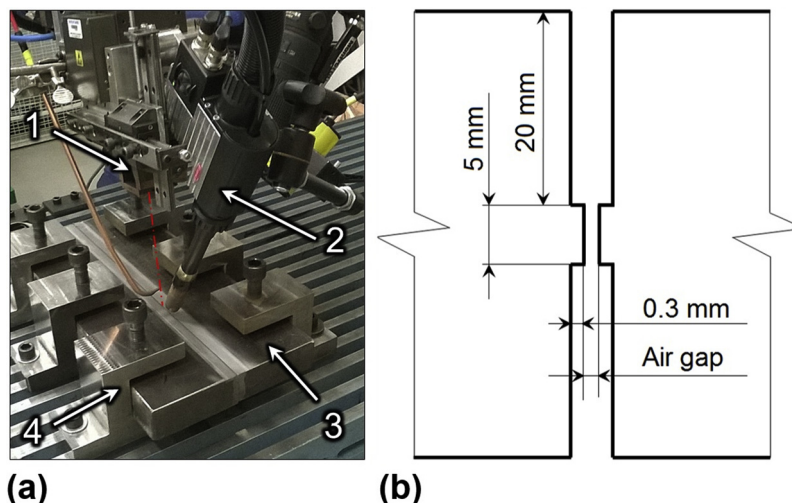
(a) Experimental equipment: 1 – laser beam head; 2 – MAG torch; 3 – specimens; 4 – clamping system. (b) Groove geometry preparation.
